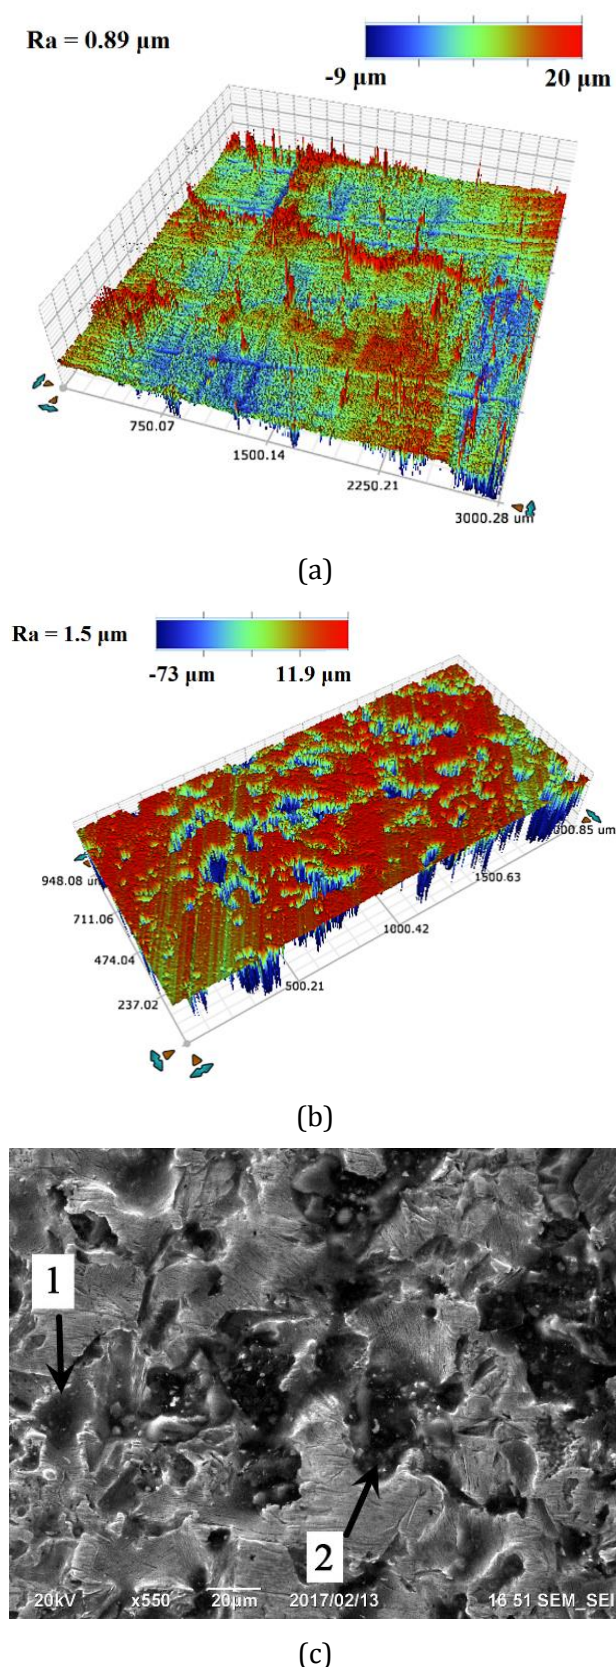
3D surface of flat sample, (a) After grinding, (b) After plasma carburizing with single pass, (c) Carburized surface, 1 Trace of partial melting, 2 Coating remnant.
